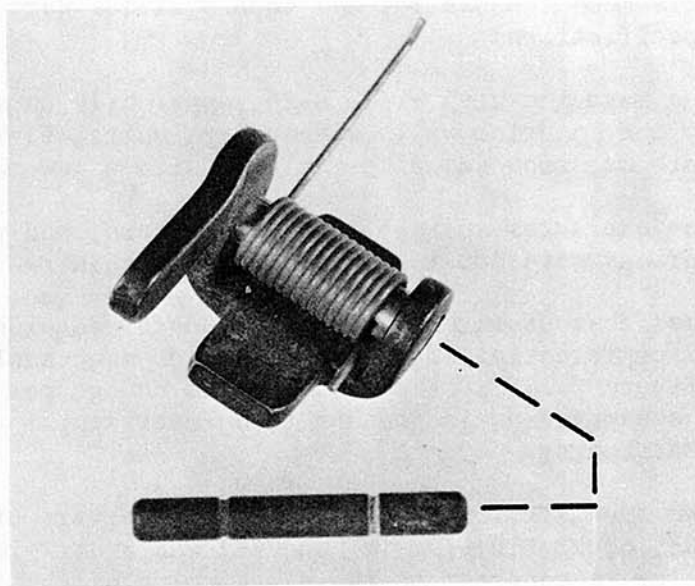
An Automatic Sear Assembly and Sear Pin are Shown.
